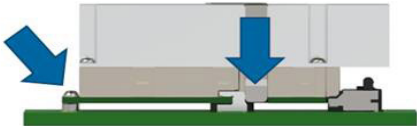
MODULE INSTALL AND LATCHING WITH LOW SPEED CONNECTOR LATCH
